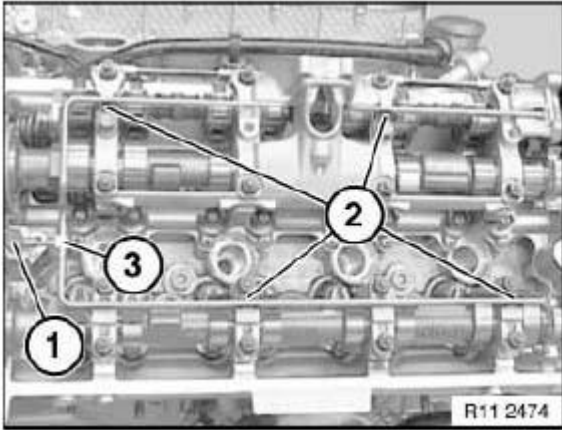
Identifying Clip Oil Line, Retainers And Screw
